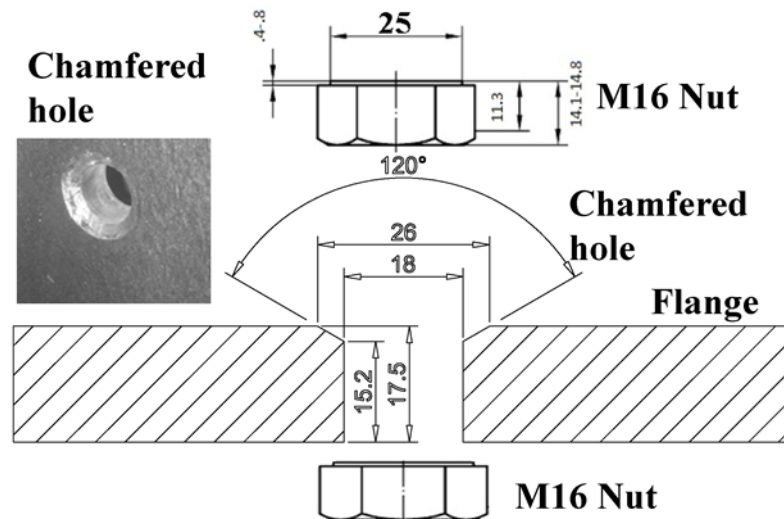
Countersunk seat of 120 degrees chamfered bolt hole
